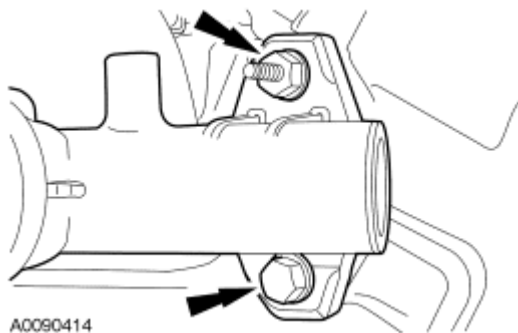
Locating Coolant Bypass Tube Bolt & Nut
